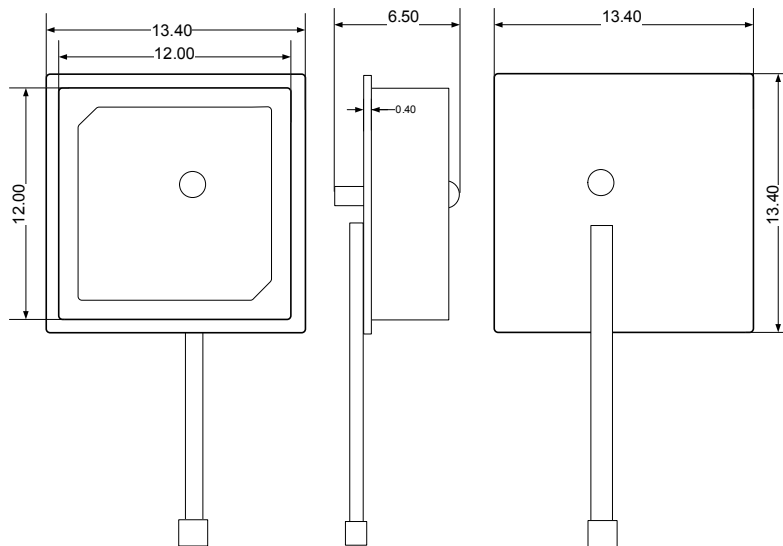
ORG9802 MECHANICAL OUTLINE
